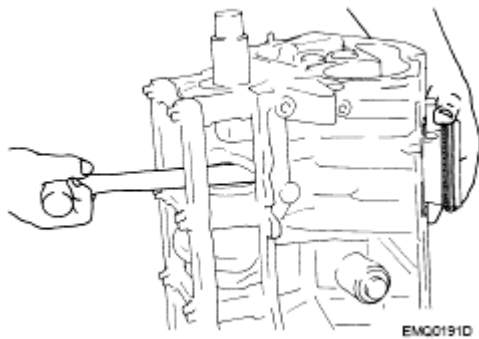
Pushing Piston And Connecting Rod Assembly Out To Cylinder Head Side
